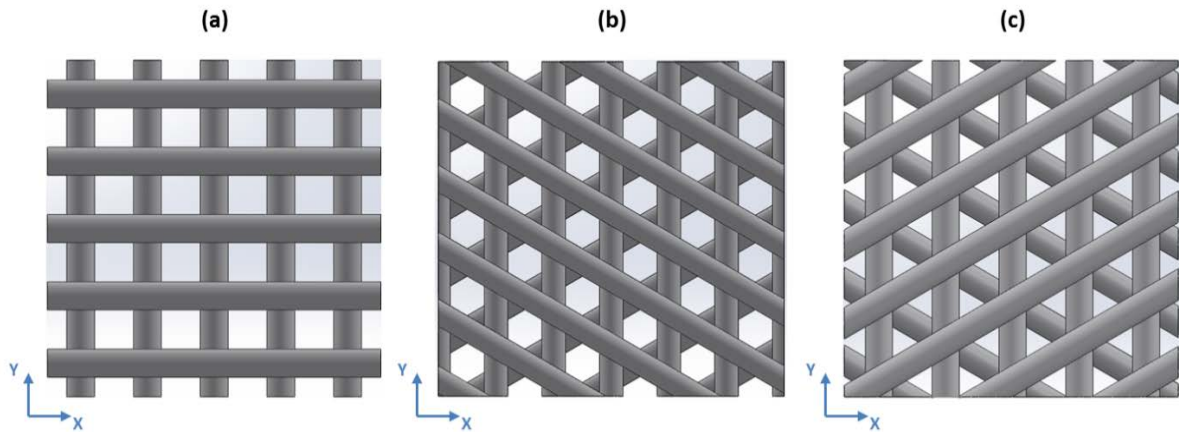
Three of most common patterns fabricated by robocasting technique; (a) square pattern; (b) honey comb pattern; (c) triangle pattern
